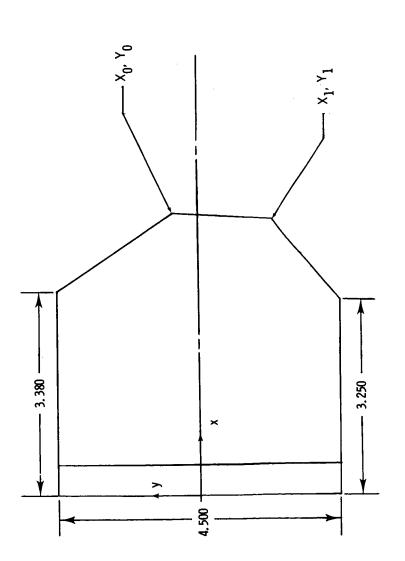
Sketch of typical sidewall showing sidewall geometry. All dimensions are in inches.
